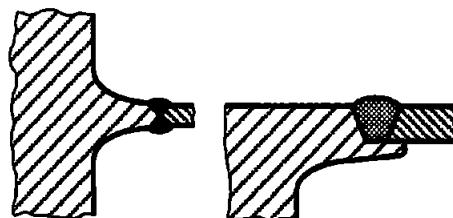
Welding flanges on steel castings or forgings
